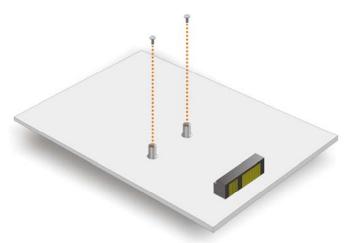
Remove the Retention Screws for the PCle Mini Card
